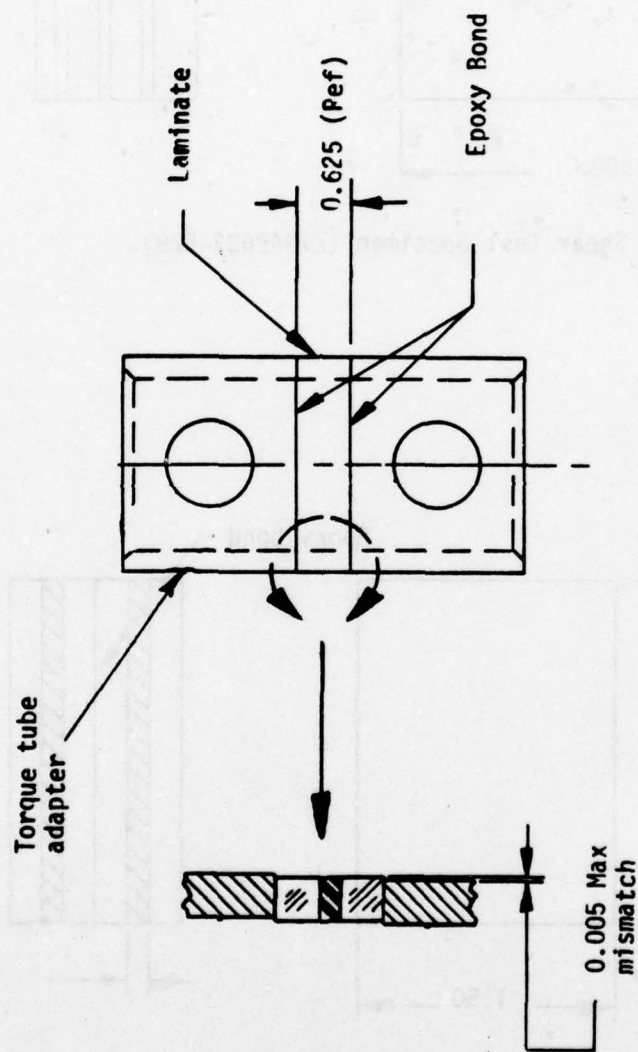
Shear Test Specimen (Z7942633-535, -539).
